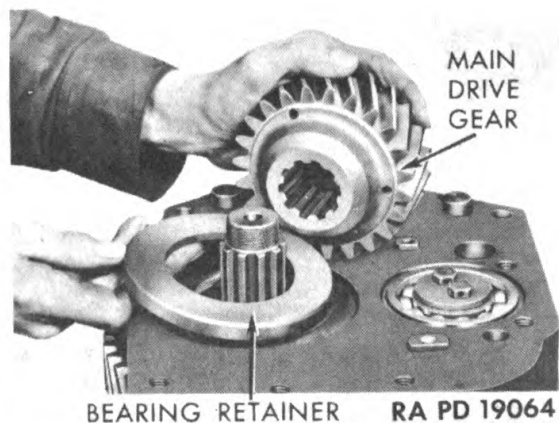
Removing Main Drive Gear and Bearing Retainer
